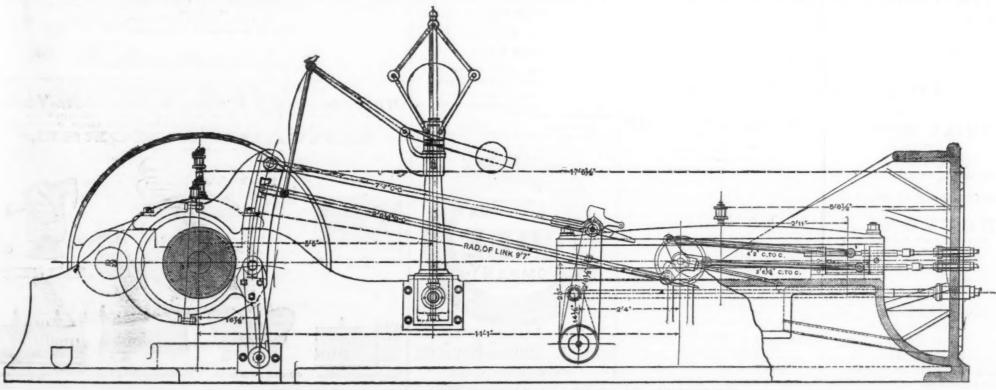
Side Elevation of Engine for Rolling Mill; Cylinder, 44 × 48 Inches.—Scale, ½ Inch to the Foot.
